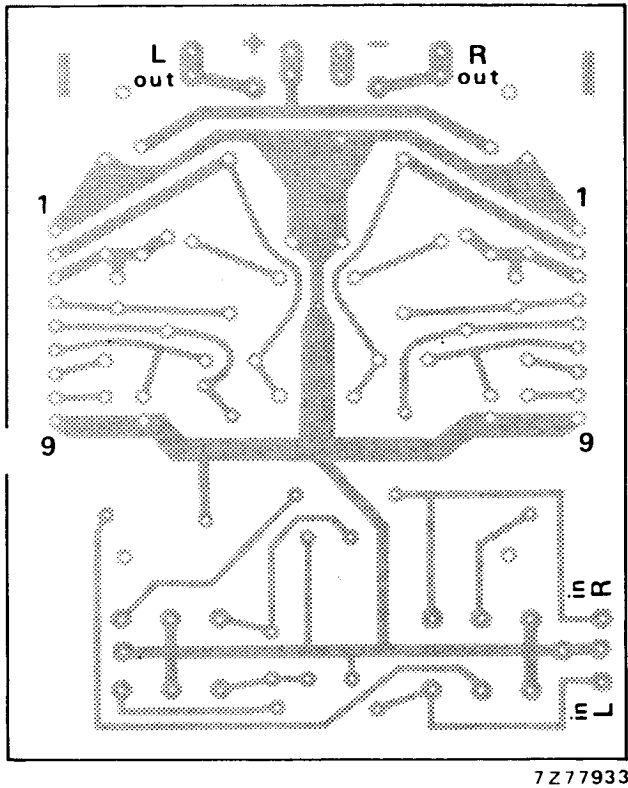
Track side of printed-circuit board used for the circuit of Fig. 12; p.c. board dimensions 83 mm x 65 mm.
